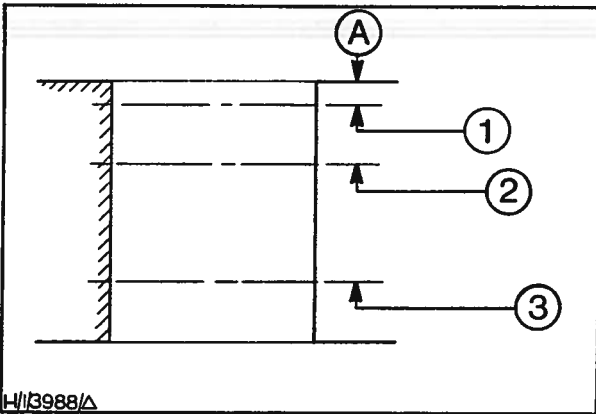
Cylinder Bore Wear Measuring Locations (See Text)
